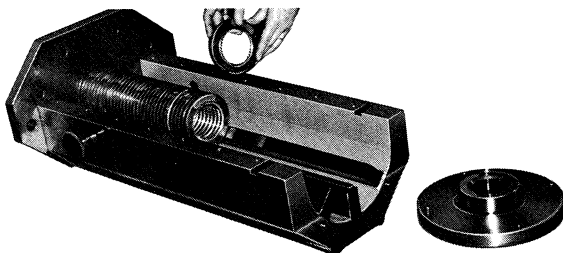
Assembling a Red Ring ring-type pot broach.
